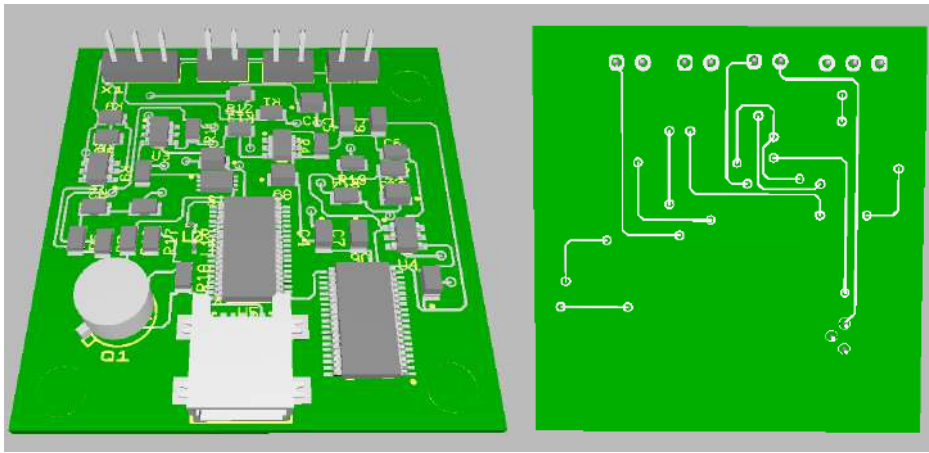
3D model of the printed circuit board of the ion-label speed meter
